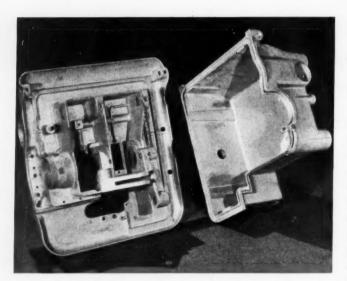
Copper tubes to serve as oil ducts are die cast in place in this sewing machine housing
